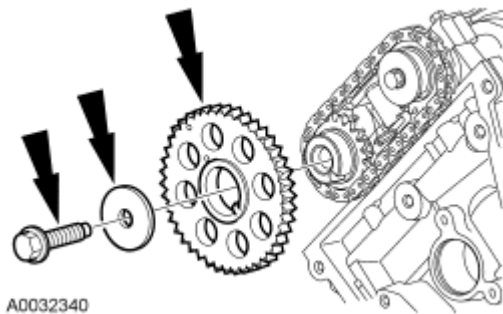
Identifying Camshaft Sprocket, Washer & Bolt
